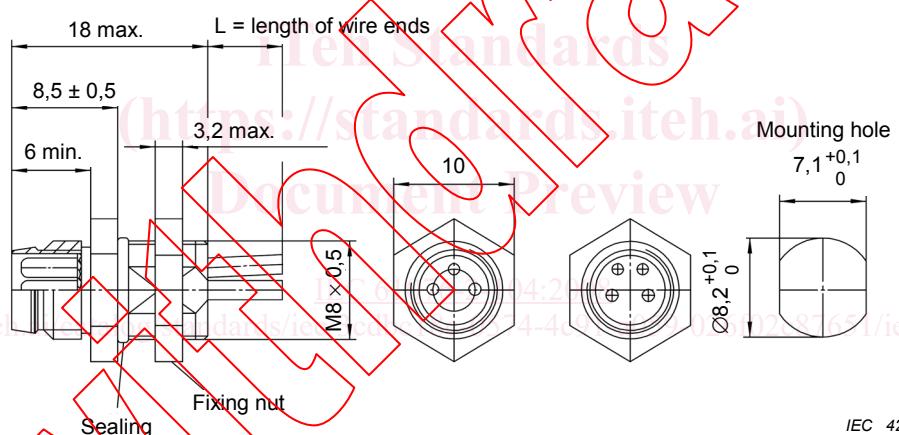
Fixed connector with wire ends, male contacts, single hole mounting
